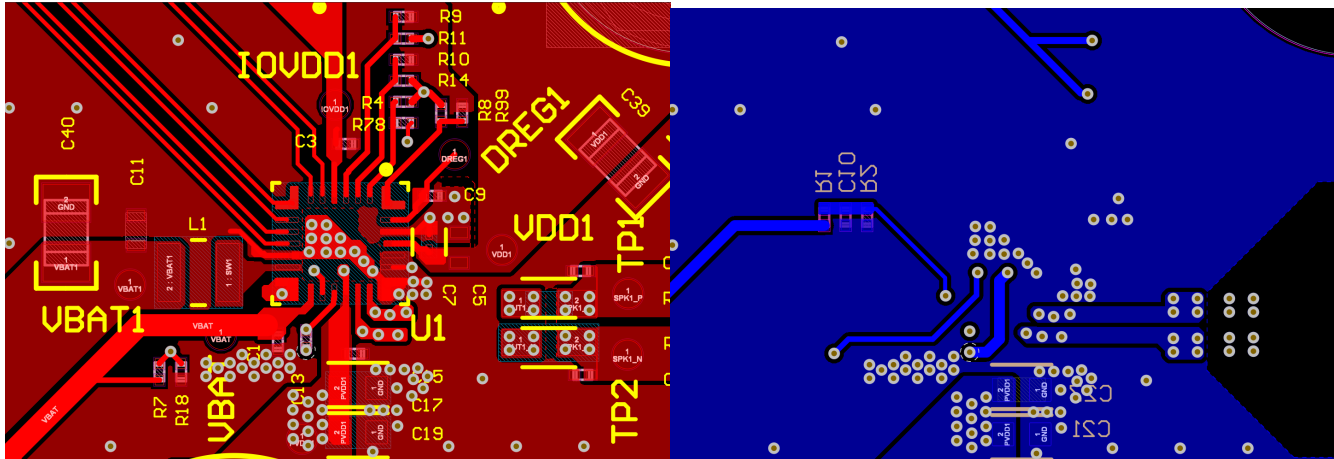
Top (Red) and Bottom (Blue) Layer – Hardware Control Reference PCB Layout
